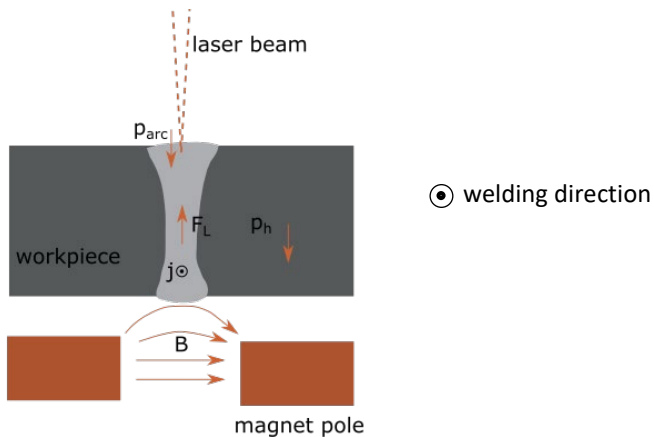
Scheme of electromagnetic weld pool support system
